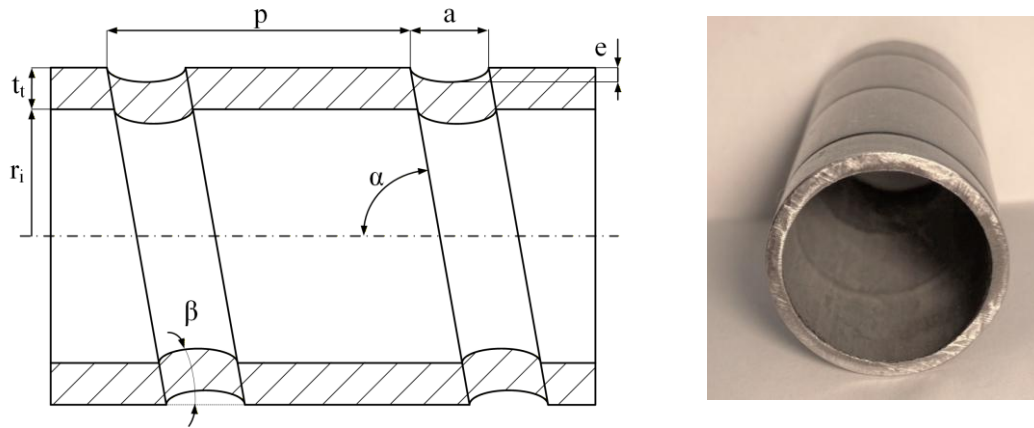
Left: Geometry definition of spirally grooved tube; Right: Specimen of the test tube used in this work [59]
